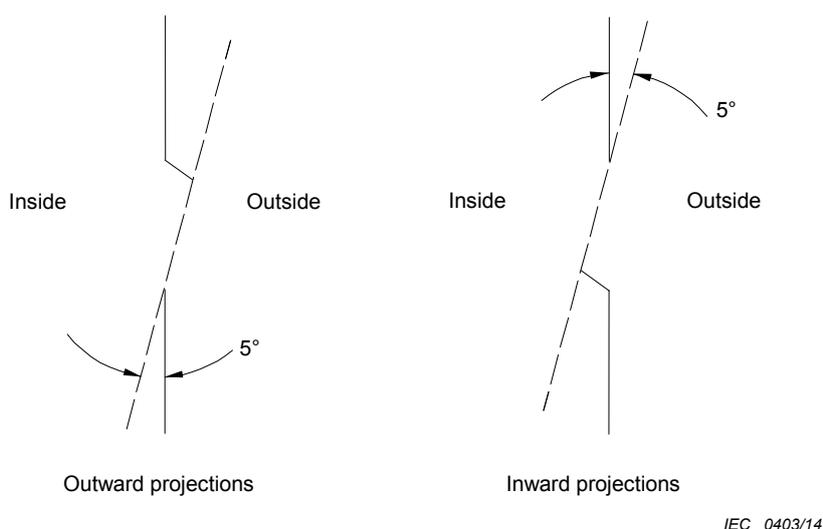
Examples of cross-sections of designs of side opening louvres which prevent vertical entry
